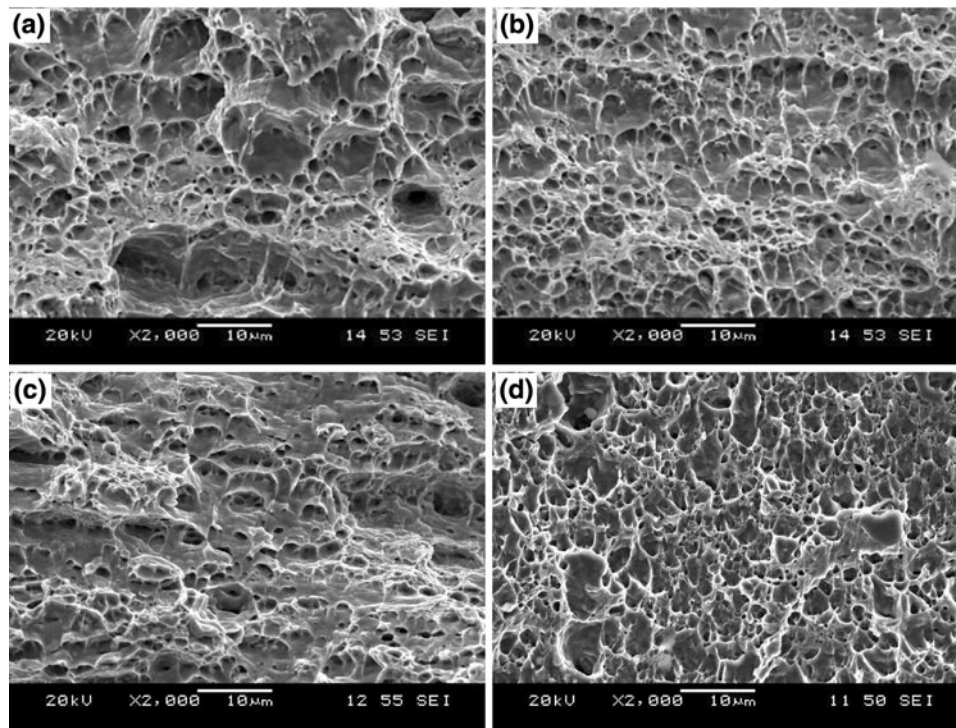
Typical SEM micrographs of tensile fracture surfaces of the welded joints tested at a strain rate of $1 \times 10^{-2} \text{ s}^{-1}$, (a) center of DP600-welded joint, (b) near-edge area of DP600-welded joint, (c) center of DP980-welded joint, and (d) near-edge area of DP980-welded joint
